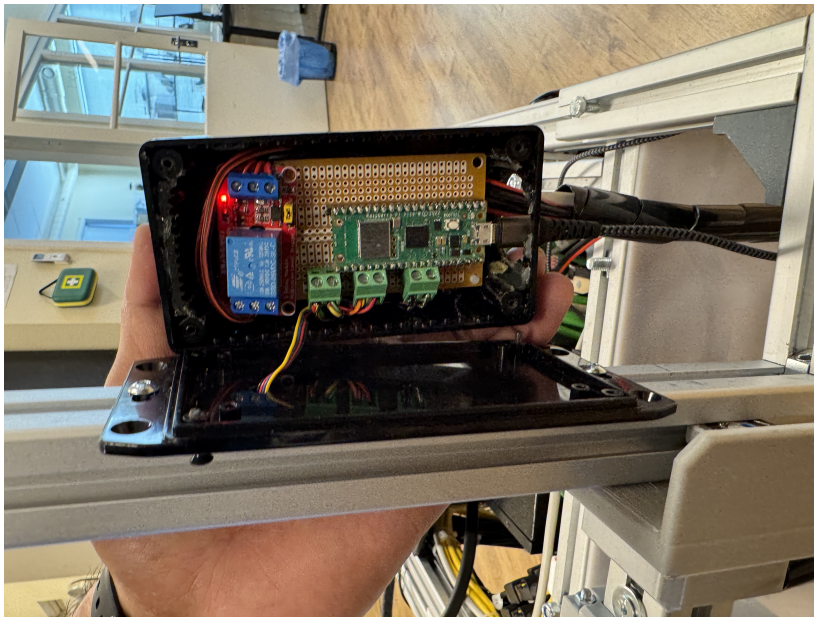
Open control box with assembled Pico and relay circuit on a manually soldered prototype board.
